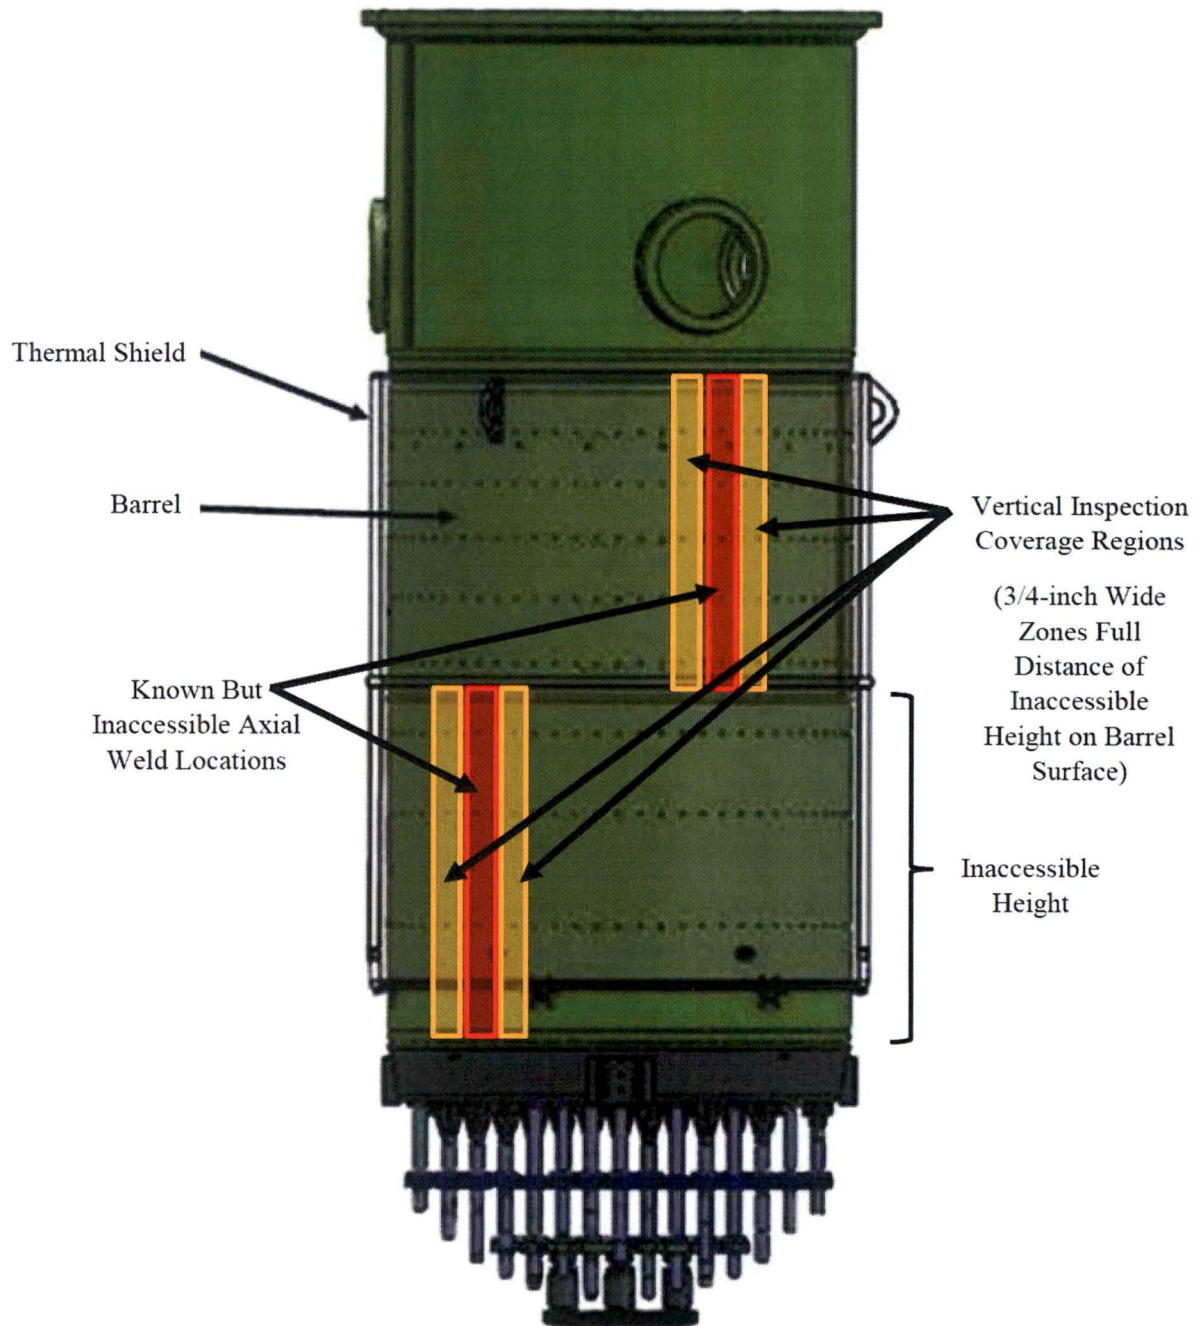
CE or Westinghouse Thermal Shield Inspection Option – Known Partially Inaccessible Axial Weld Locations
